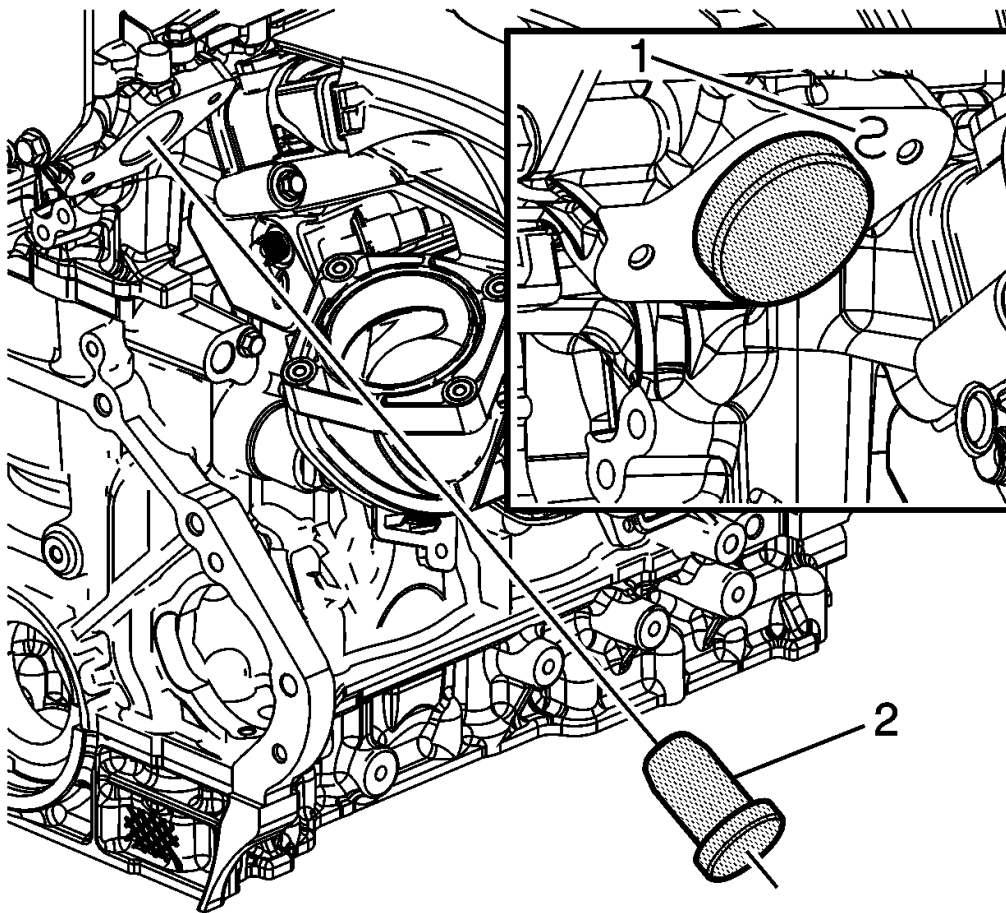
View Of HP Fuel Pump Installation Alignment Gauge
